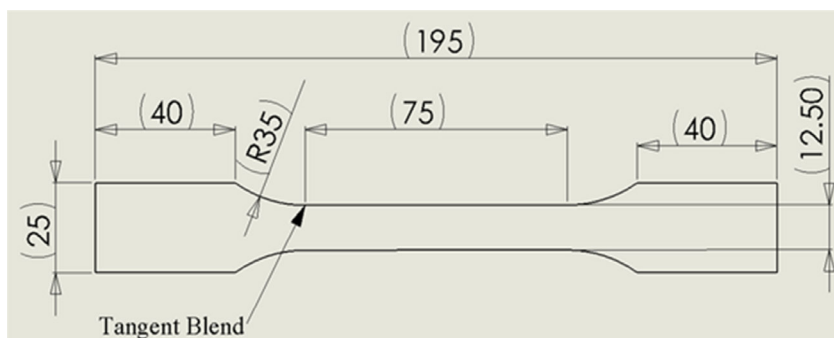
Technical drawing of the tested sample for the Uniaxial Tensile Test
